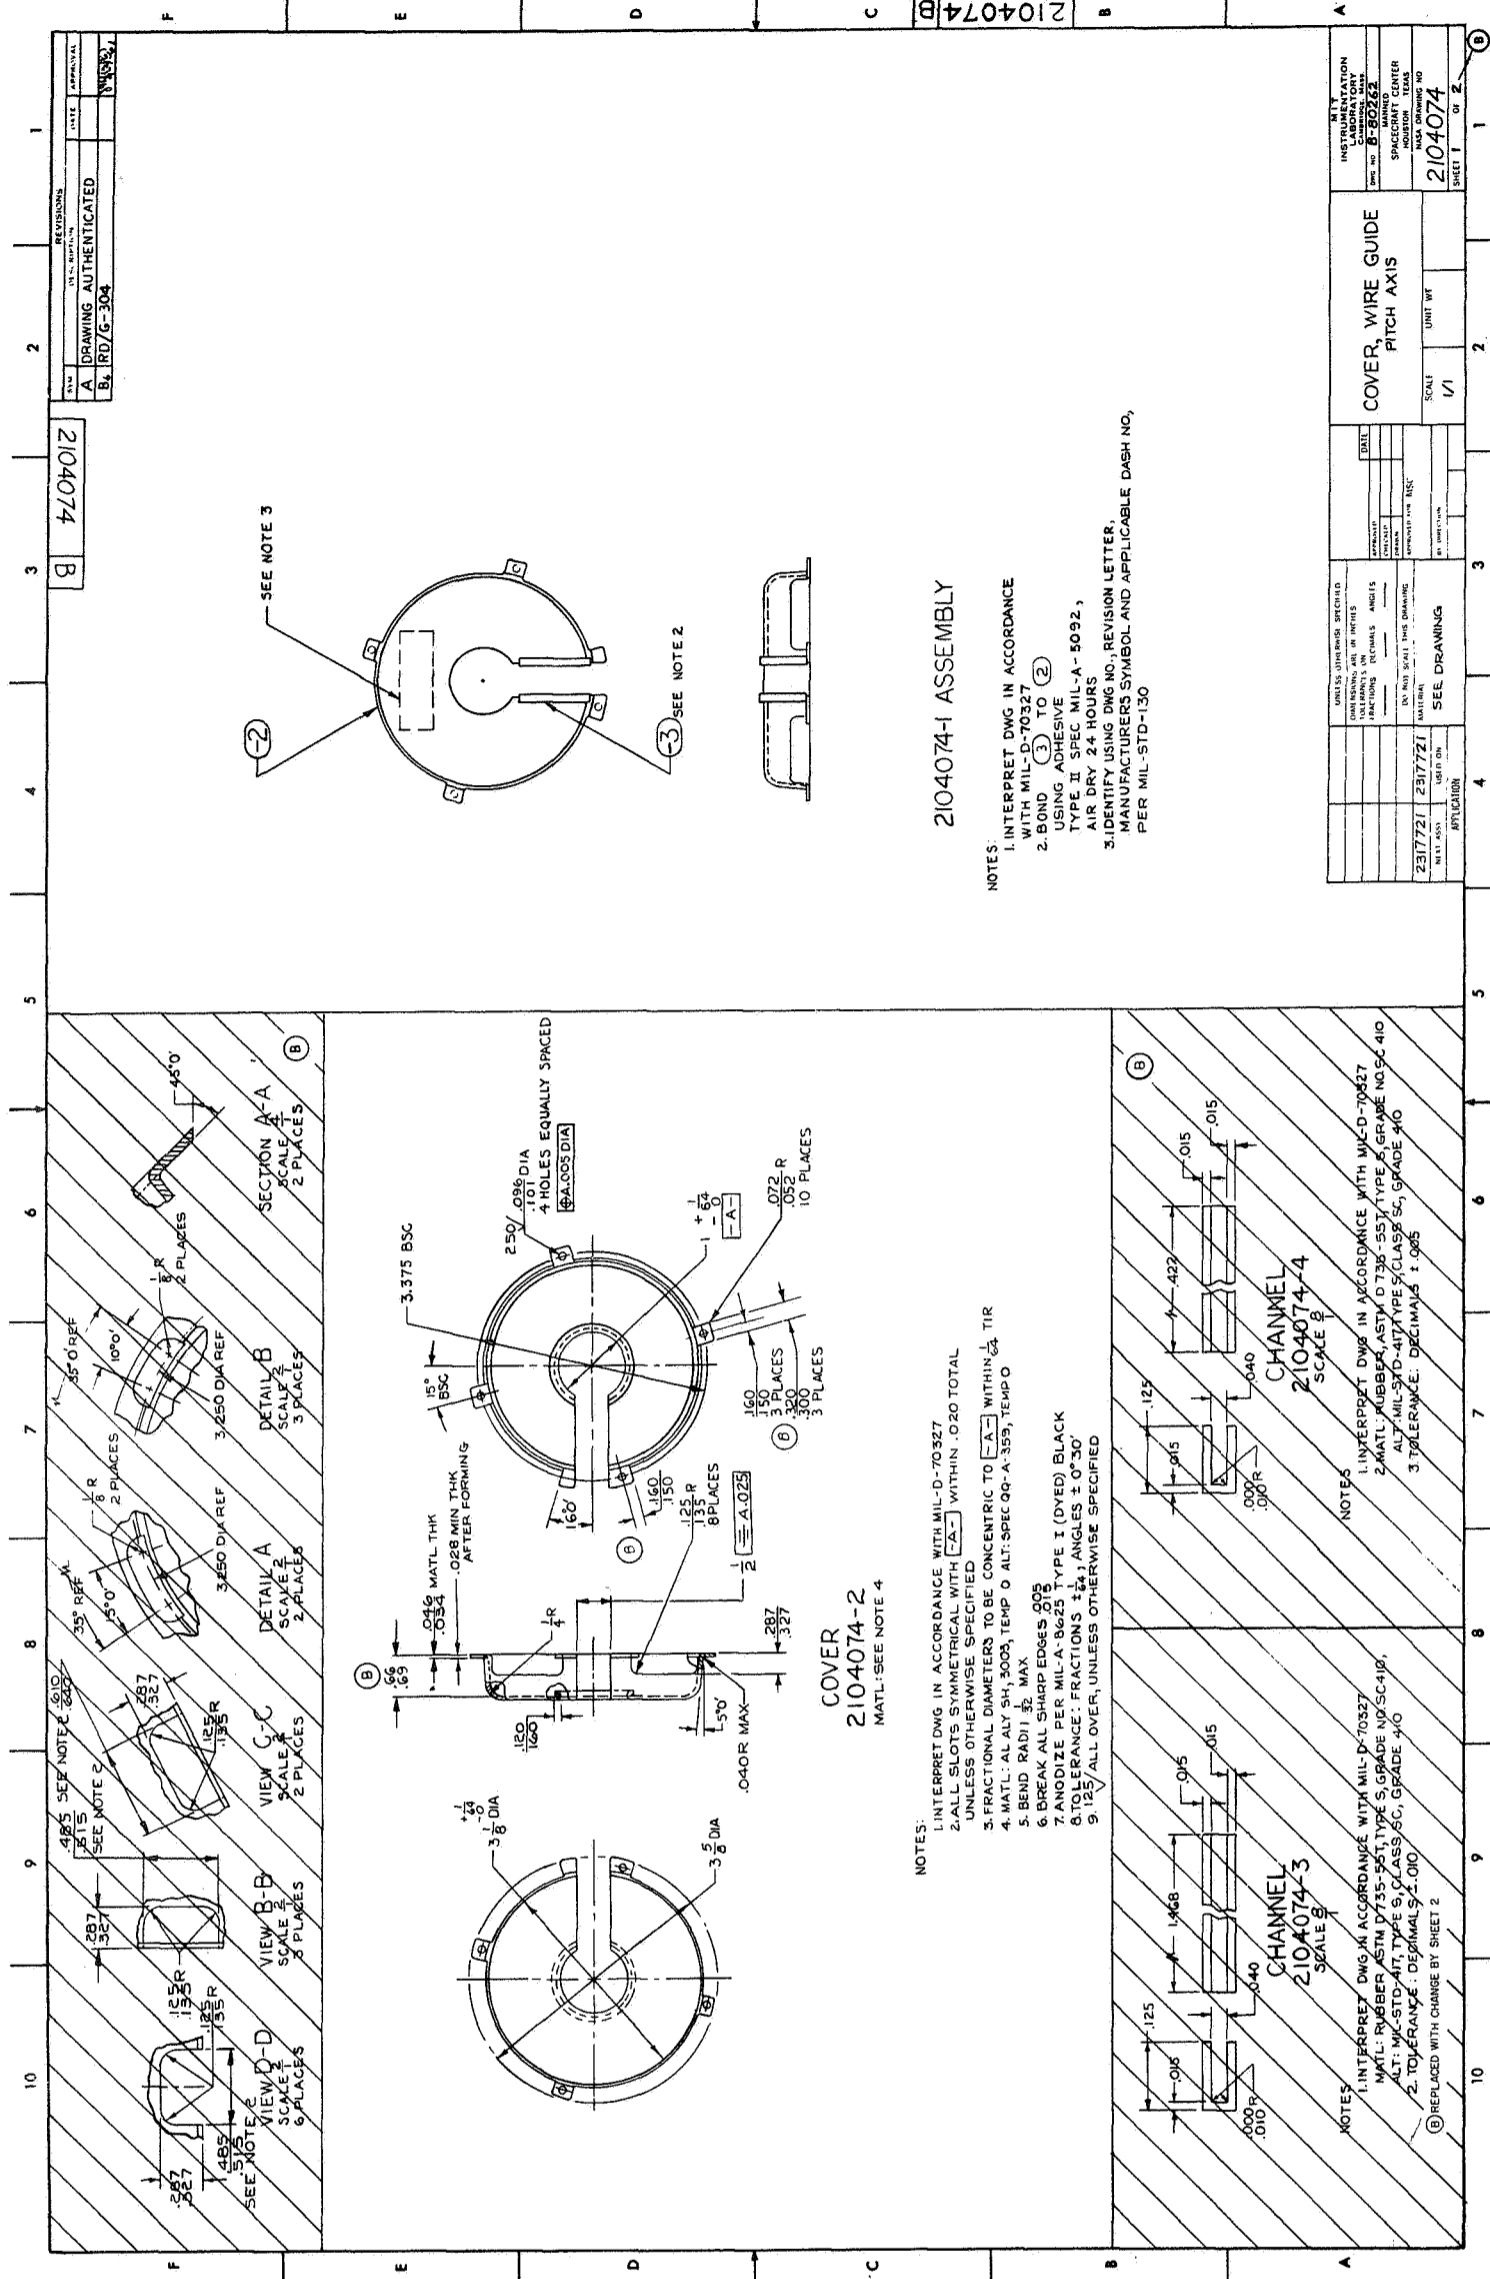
Sample Revision Showing Multi-Detail Drawing With Detail of One Part Replaced.
